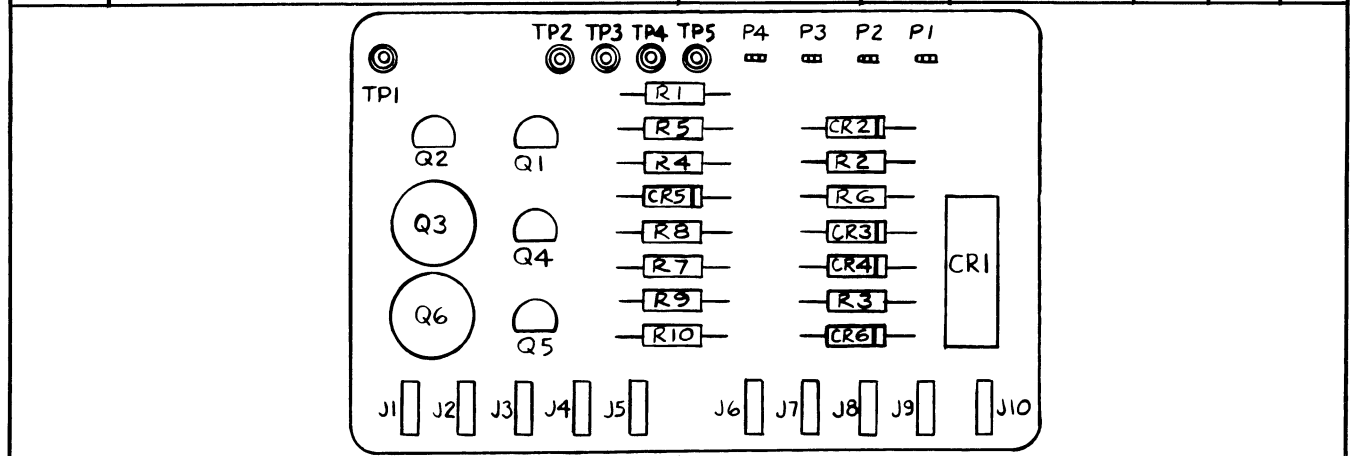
BATTERY PACK PCB ASSEMBLY
